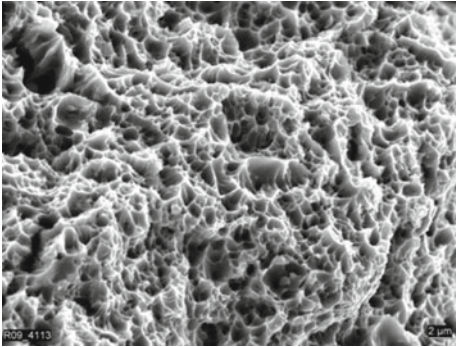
Fracture surface 20MnMoNi5 5
